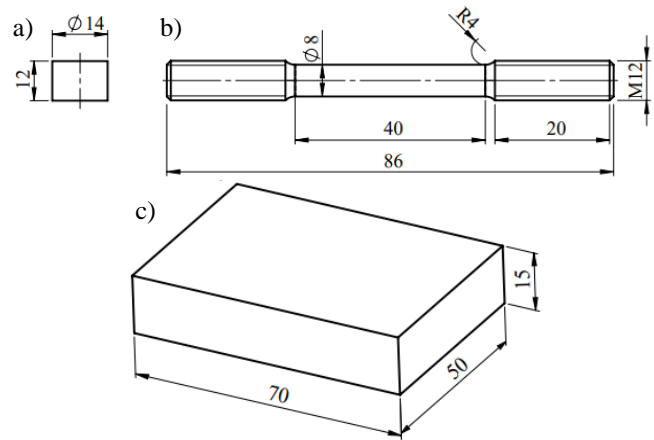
Technical details of specimens, a) Specimen for microstructural and hardness examination, b) Tensile test specimen and c) Specimen for milling test (Dimensions in mm)
